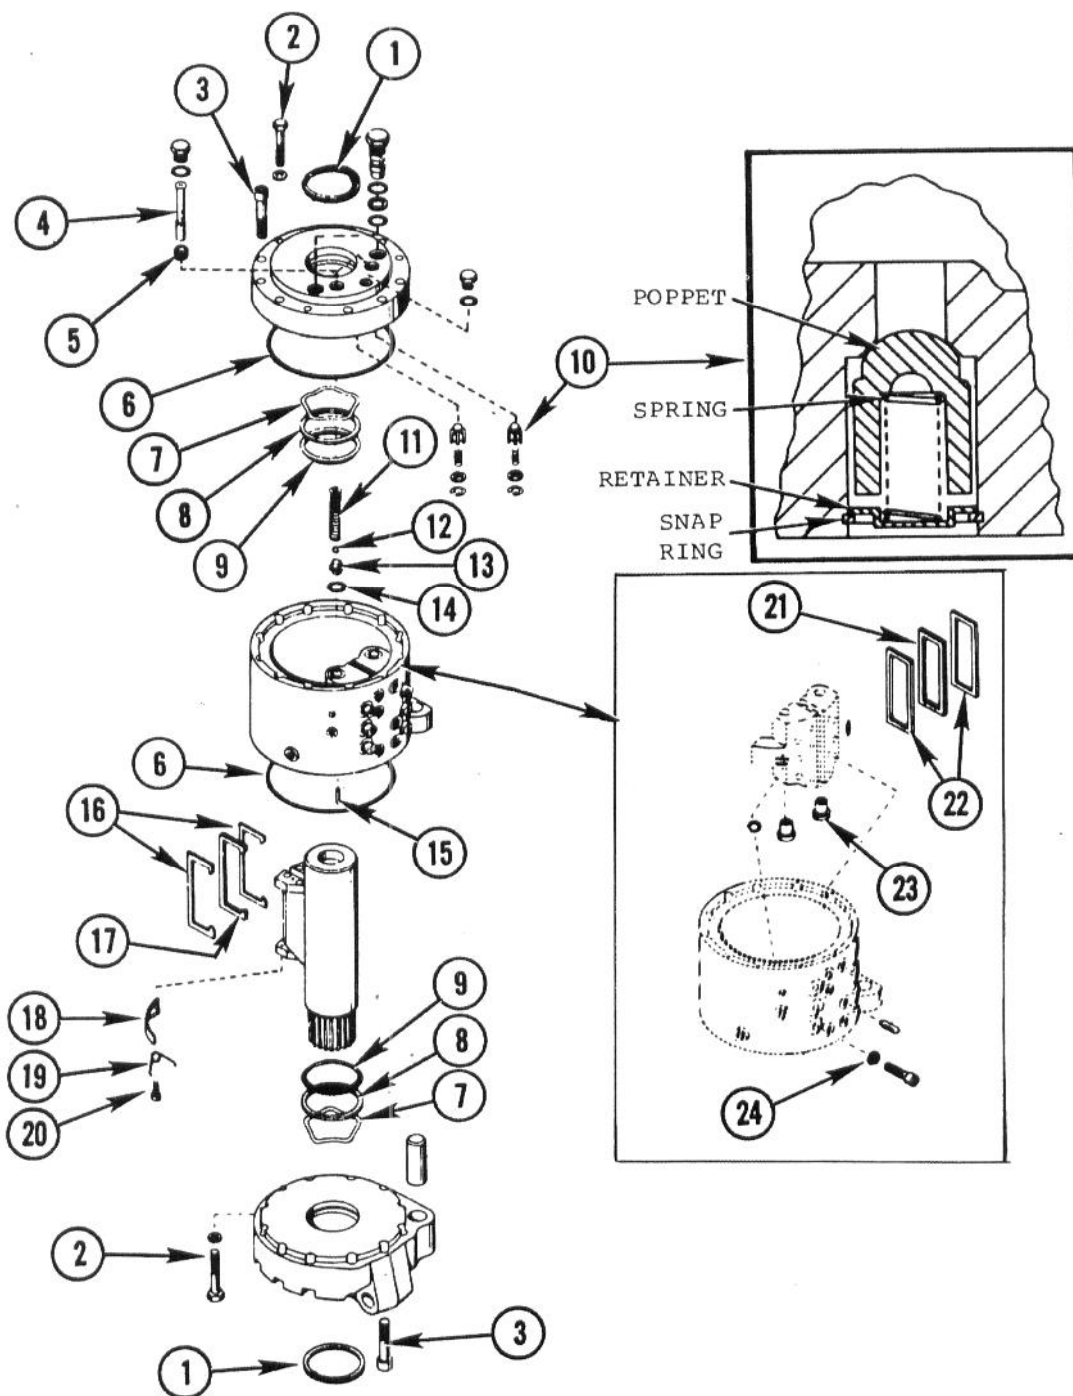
Parts Identification of Rotary Cylinder MF Part No. 729 829 M91
